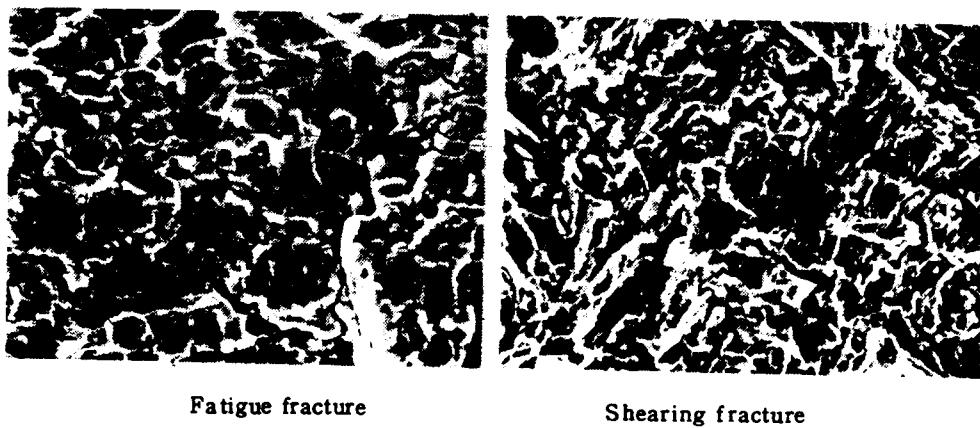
Fractographs of fractured specimen(WM of SM41 steel).
